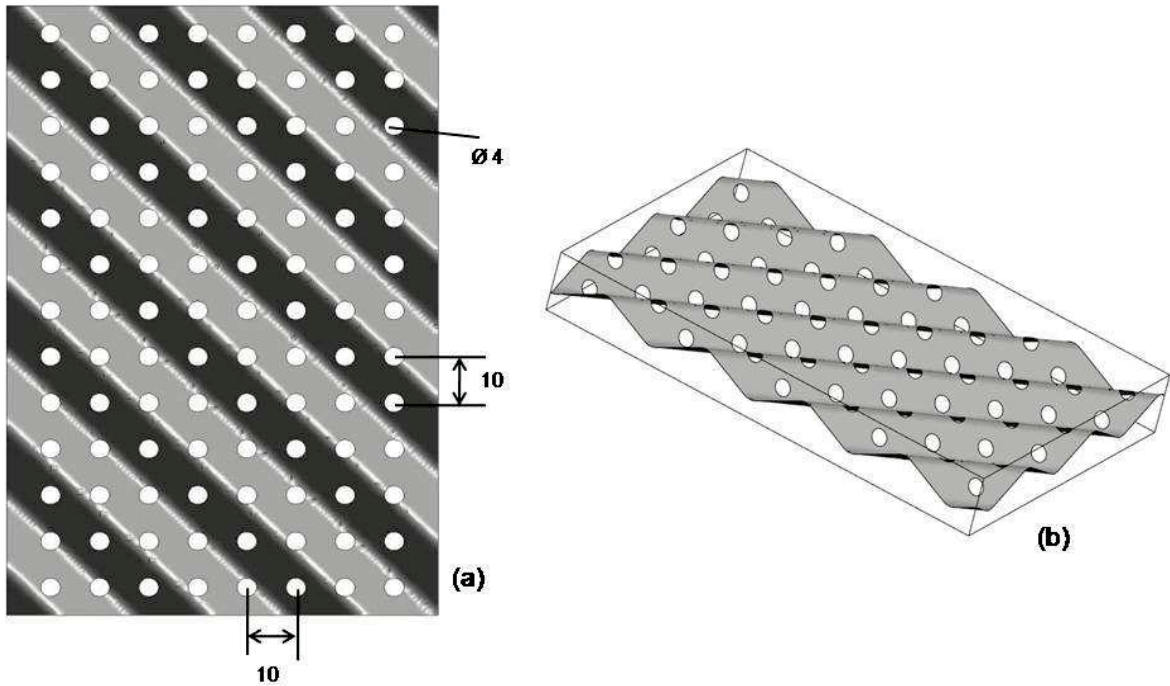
Schematic view of corrugated sheet of packing with holes. Dimensions are same as in Fig 3.4.
